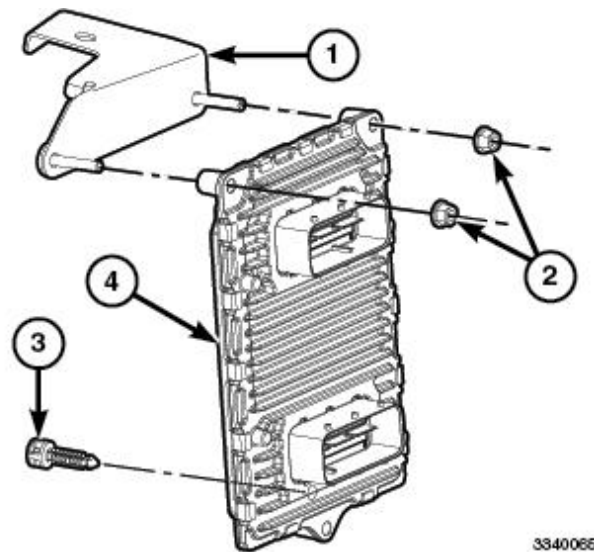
NVH Rubber Bumper, PCM, Bracket & Nuts
